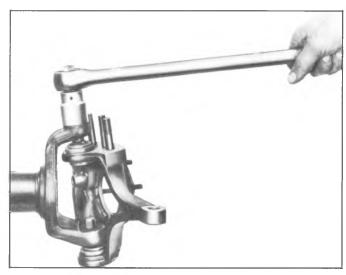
C-9K-Removing Ball Socket Retaining Nut
